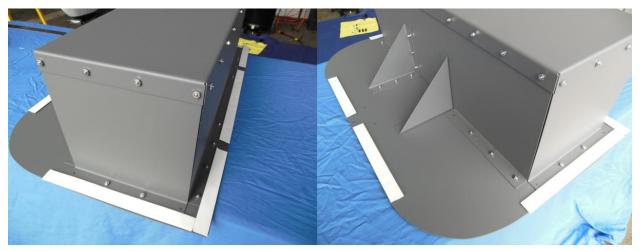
Aft Bulkhead Assembly with foam tape installed.
